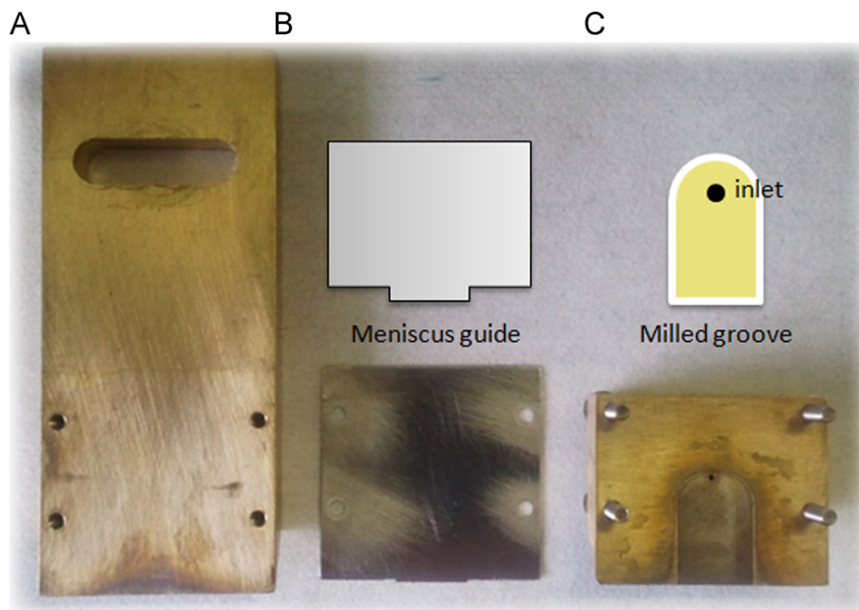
(A) Coating head brass backpiece. (B) Illustration of the meniscus guide (top) with the actual steel insert with the 13 mm × 2 mm meniscus guide (bottom). (C) Illustration of inlet and liquid groove (top) with the front coating head brass piece, showing the groove for ink passage and the ink inlet (bottom).
